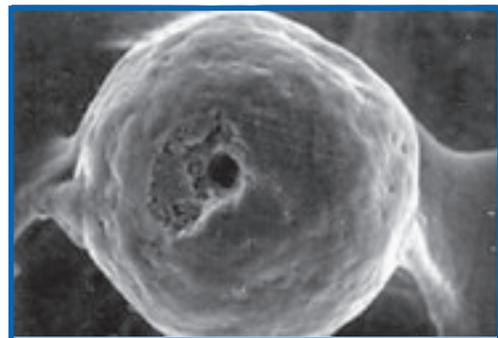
0.0005-in.-diameter hole hand-drilled into a 0.0007-in.-diameter carbon ball.
